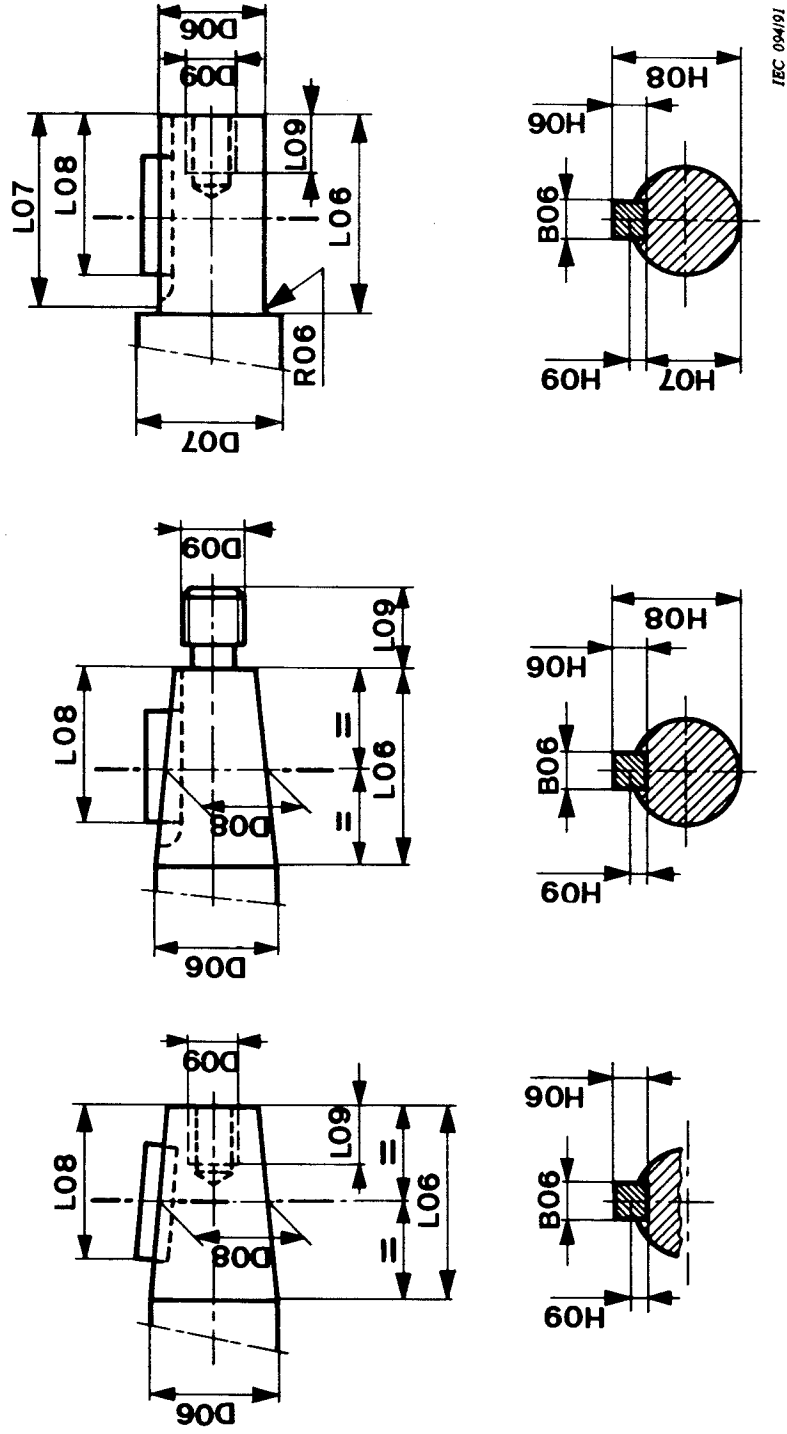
Mounting dimensions for shaft extension at the N-end
